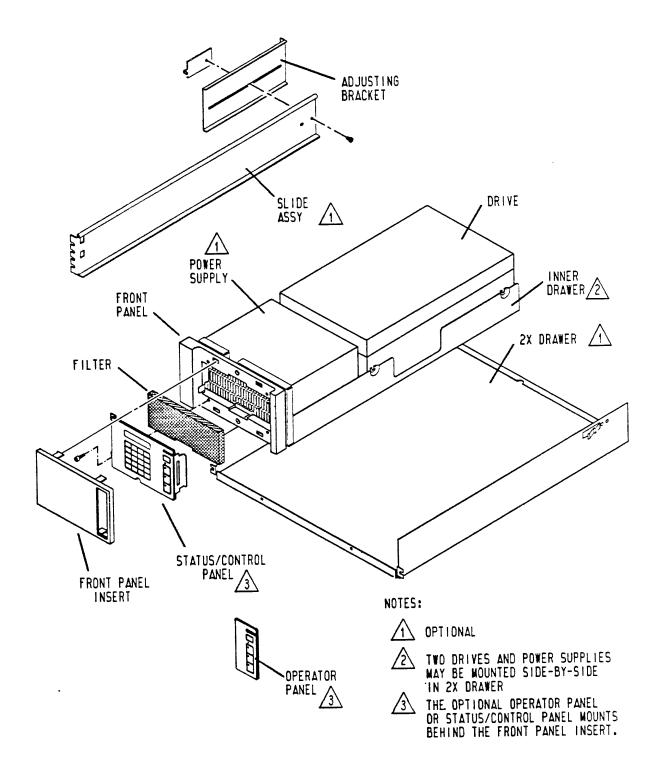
Drive Major Assemblies (Sheet 1 of 2)
